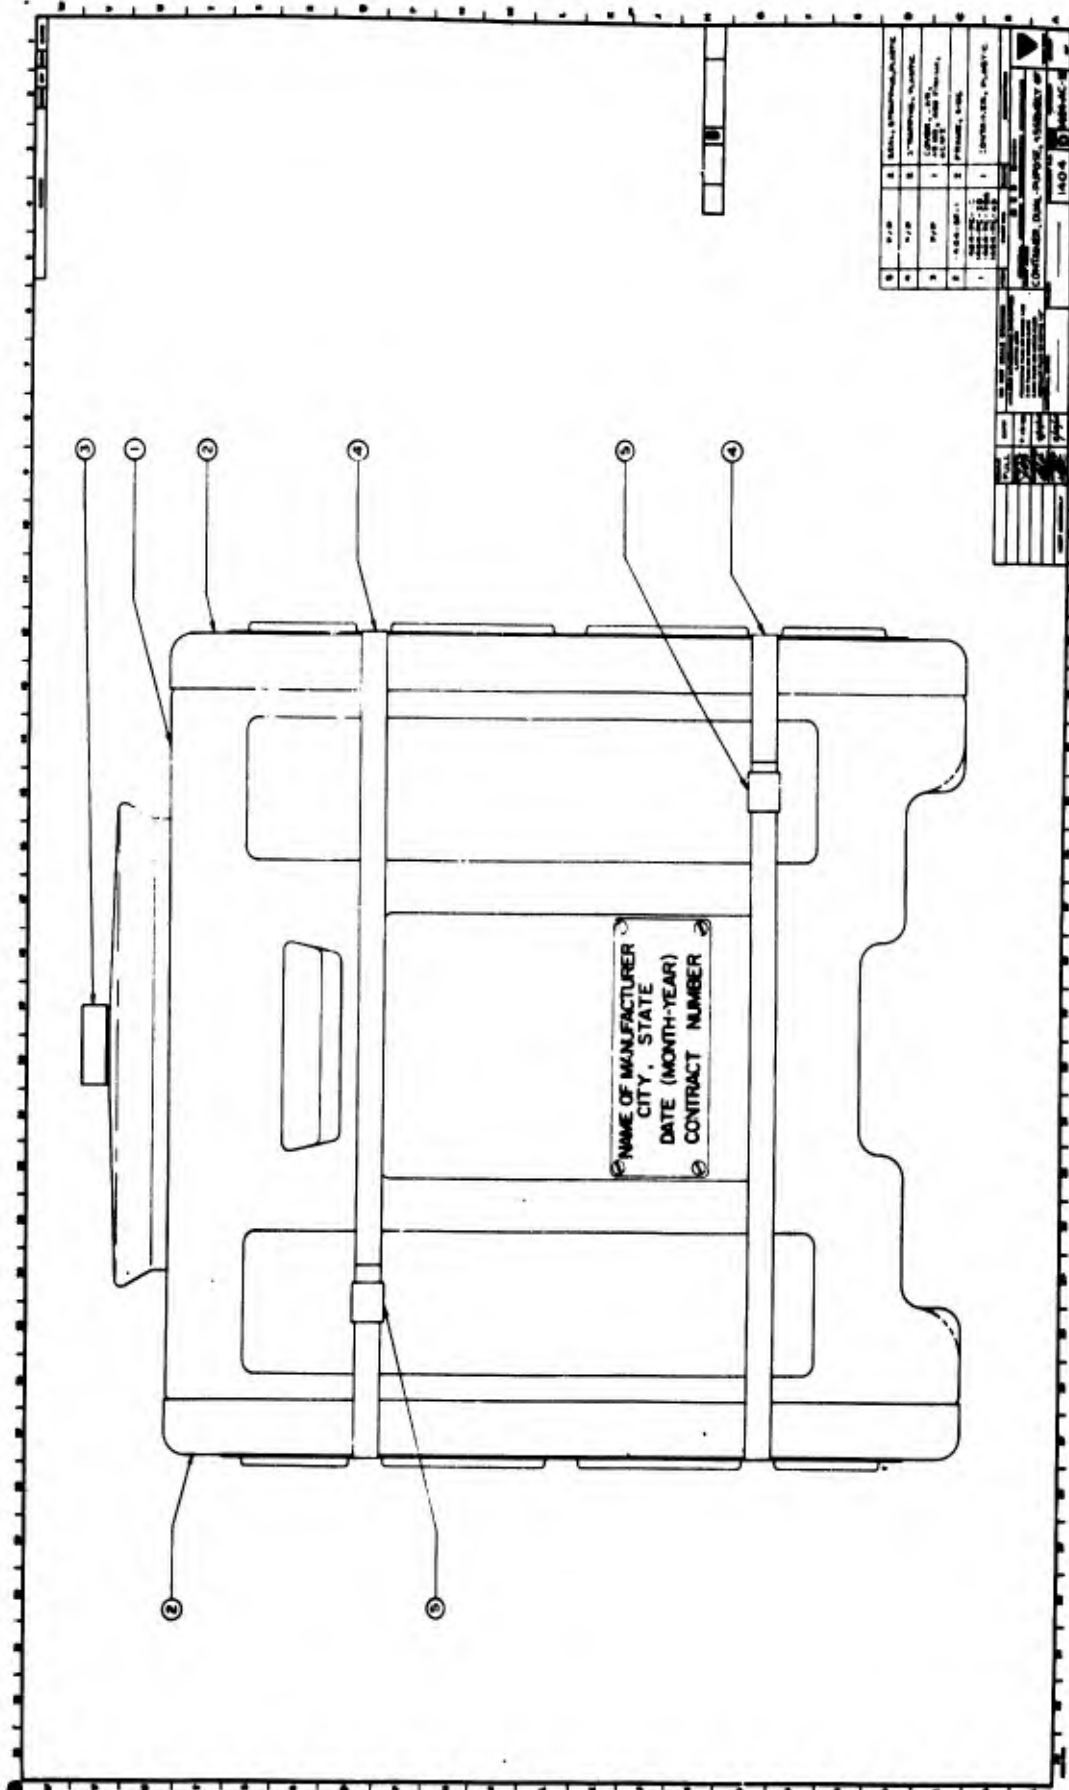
CONTAINER ASSEMBLY, BACK VIEW
